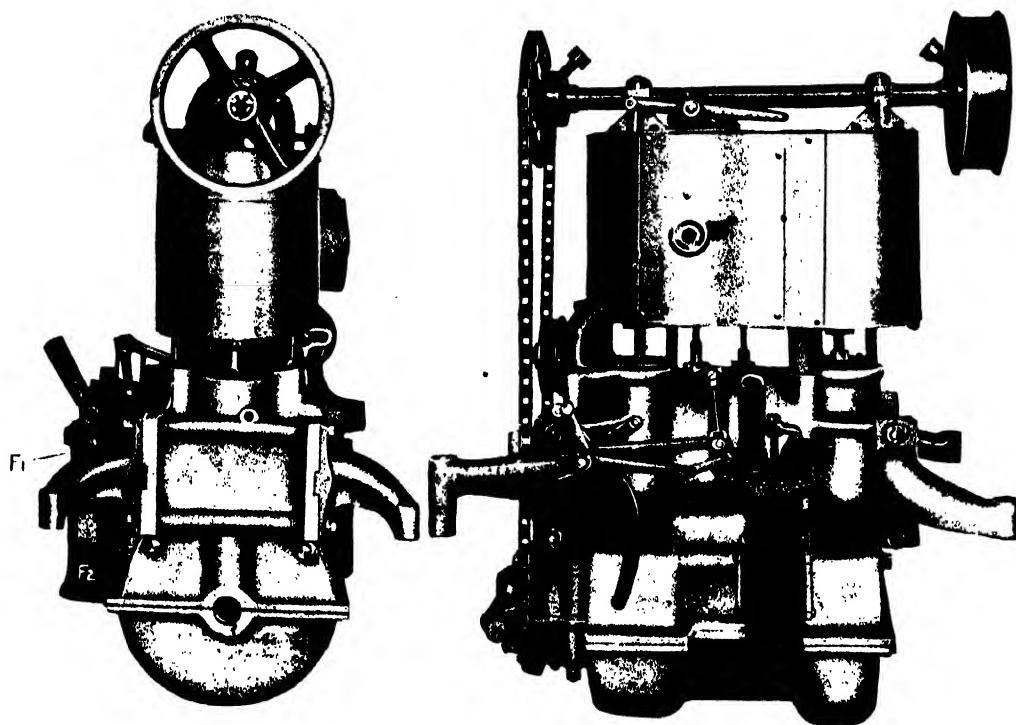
30-H.P. White Steam Car Engine. End and Side Elevations
